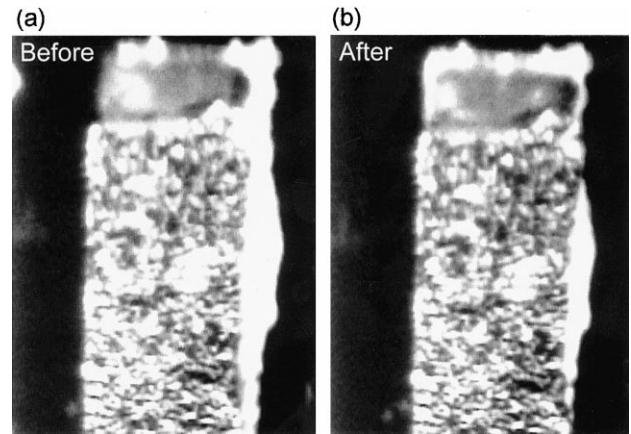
Observation of self-align soldering of a LD bar on the silicon submount before and after the soldering.
